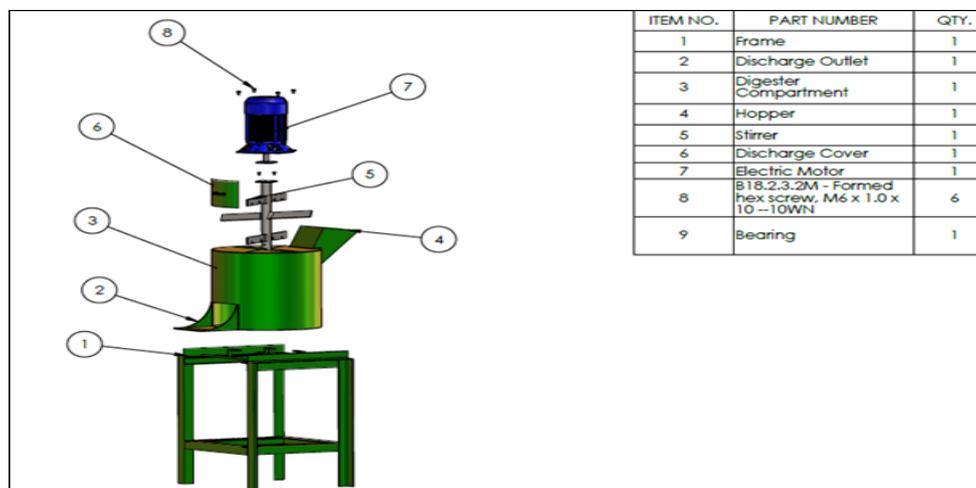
Exploded view of a motorized oil palm fruit rotary digester machine
